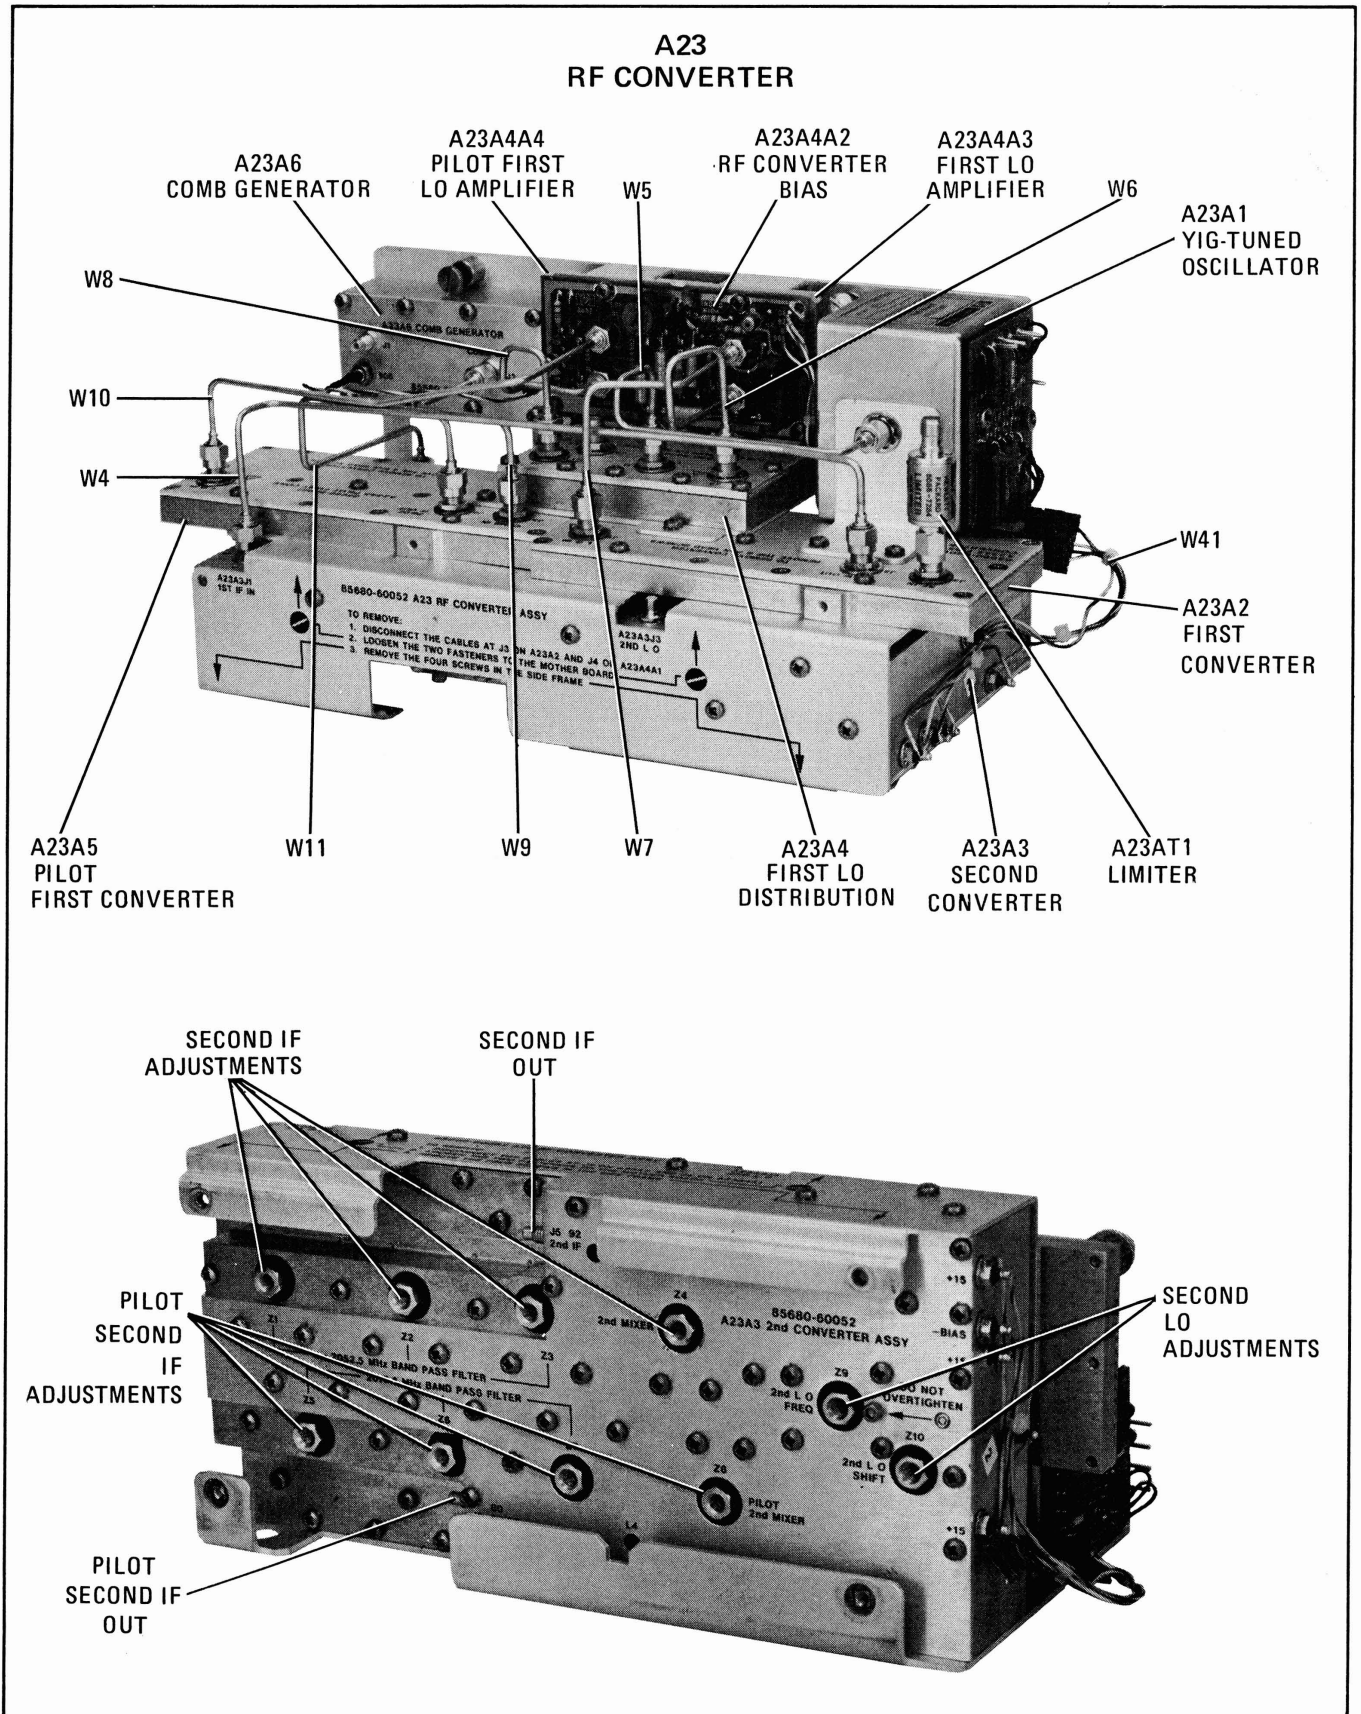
A23 RF Converter, Assembly and Component Locations
